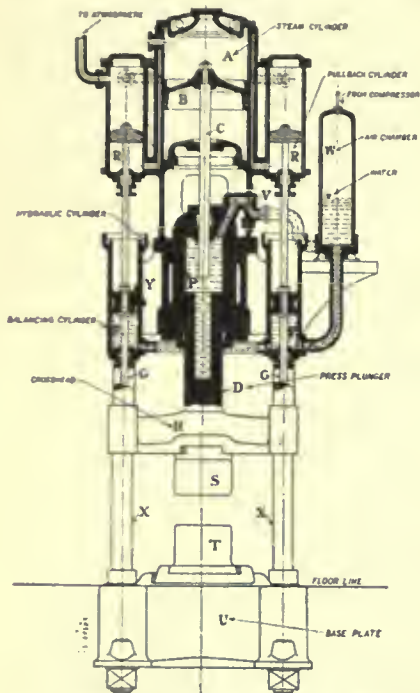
SECTIONAL DRAWING OF MESTA-HANIEL & LUEG PRESS.
